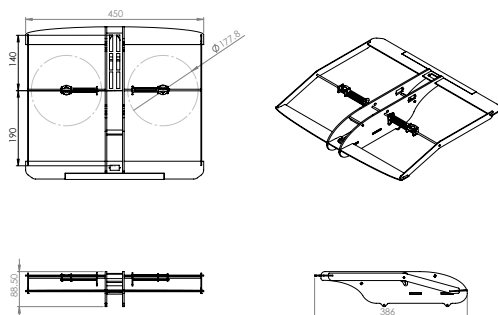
Isometric and three-view CAD drawing of Flight Prototype Two airframe, showing the layout and principal dimensions (not to scale).
